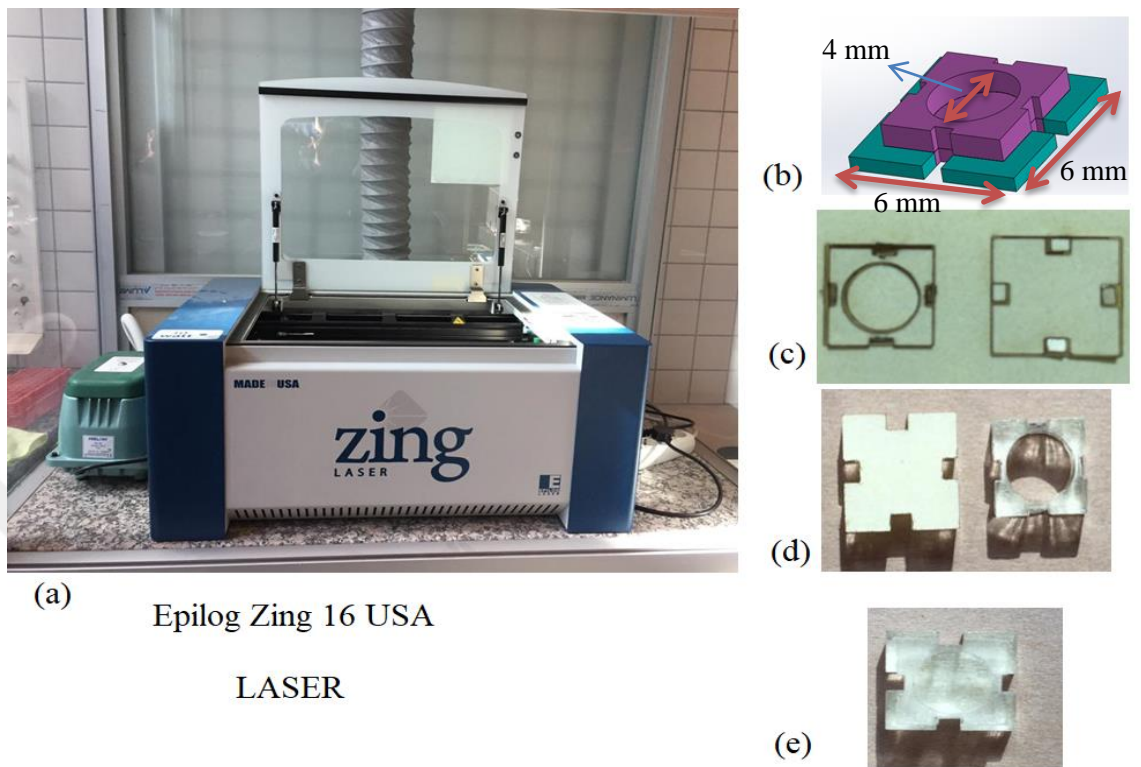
(a) Laser Cutting Machine and ventilation system, (b) CAD design of fluidic reservoir, (c), (d) The fluidic system after laser cutting, (e) Final Setup.
